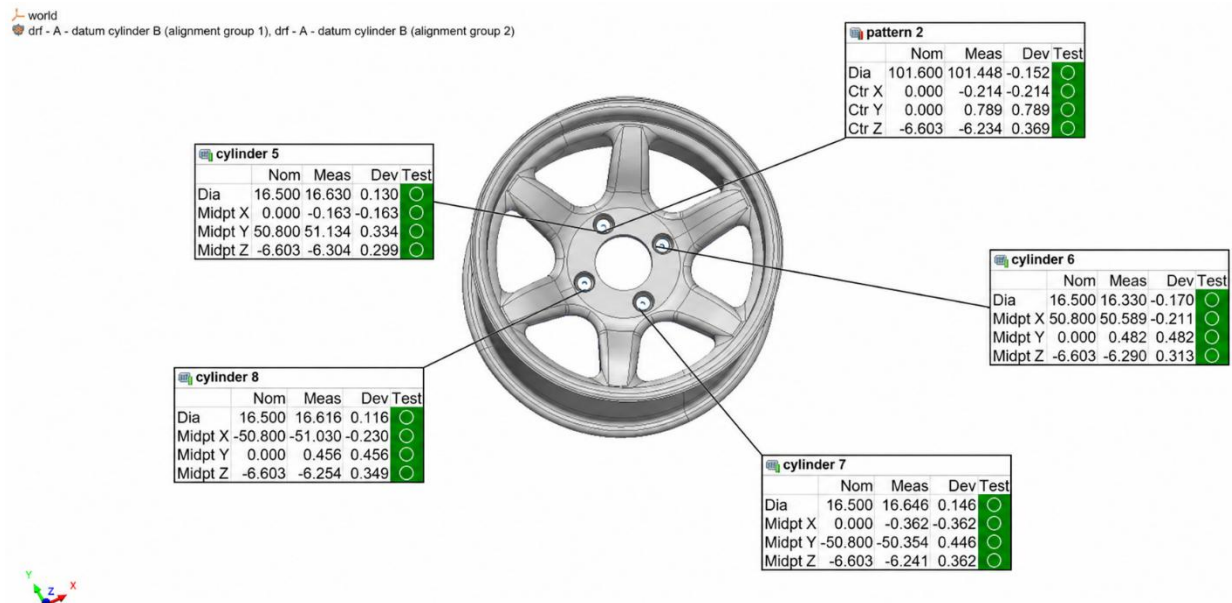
Inspection report showing PCD of bolt holes being to spec allowing for proper mating between the two assemblies
